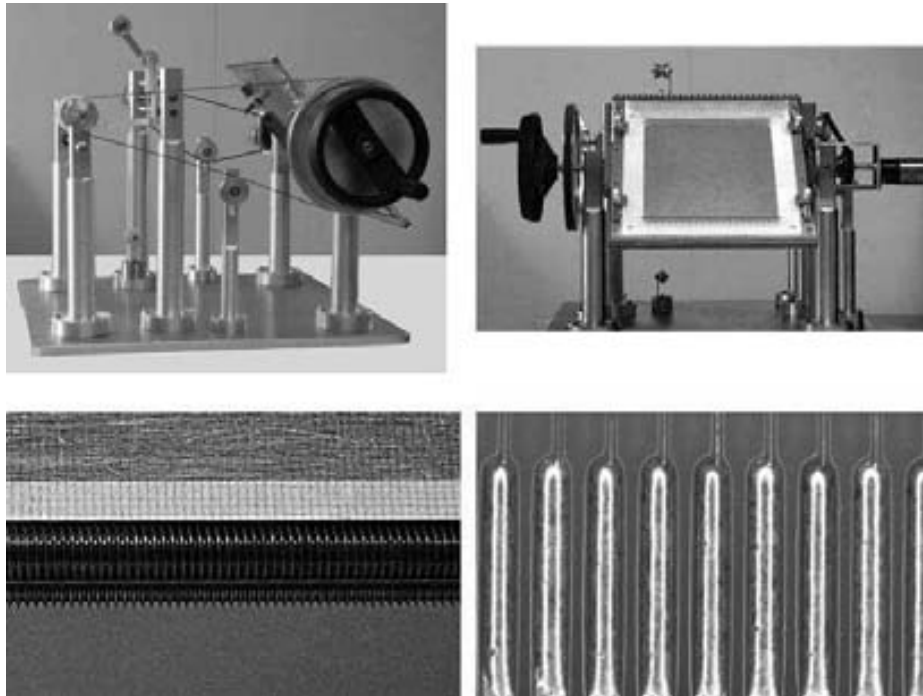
Different pictures of the semi-automatic positioning and soldering method. From left to right and up to down: 1) Lateral view of the machine 2) Front view of the machine 3) Detail of the positioning screw 4) Finished solders.
